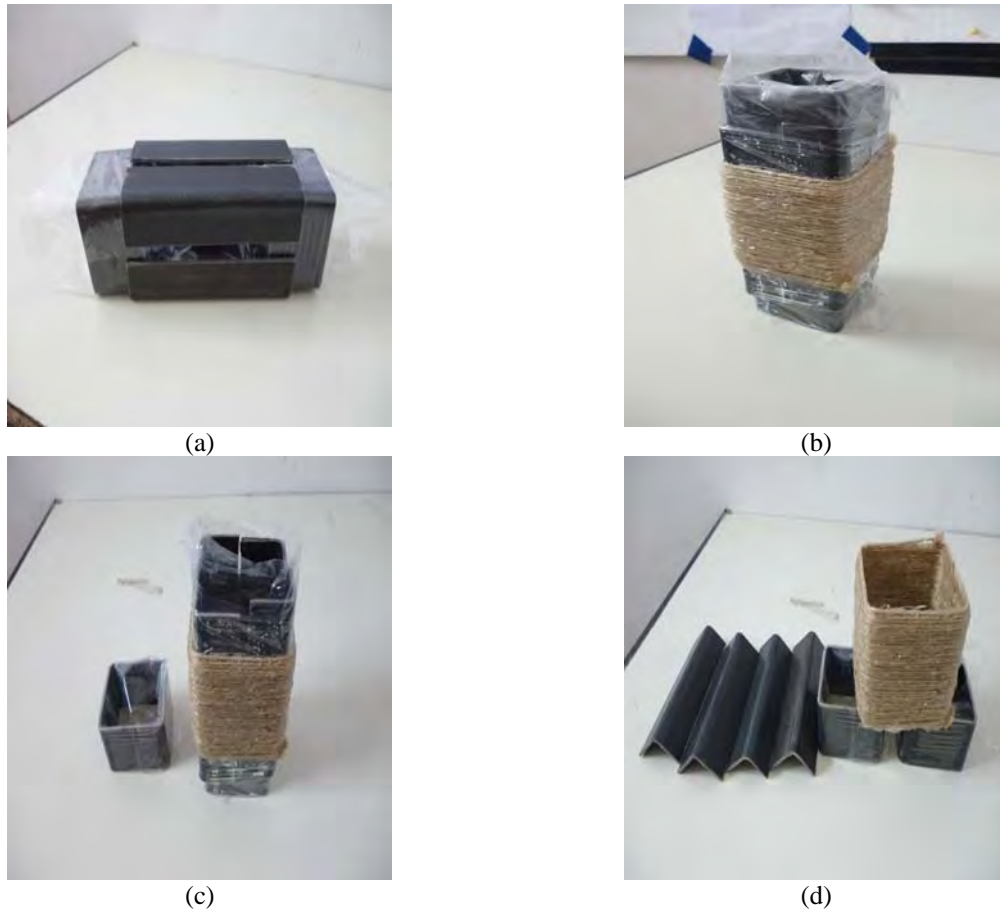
(a) Design assembly, (b) Hardened composite, (c) End cap is removed and (d) Exploded assembly.
